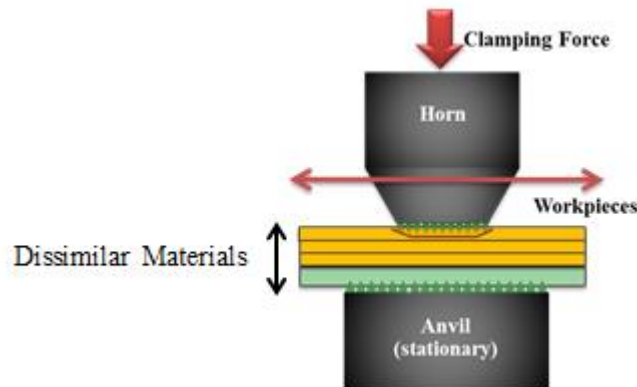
Ultrasonic welding machine (Shao et al. 2013)
